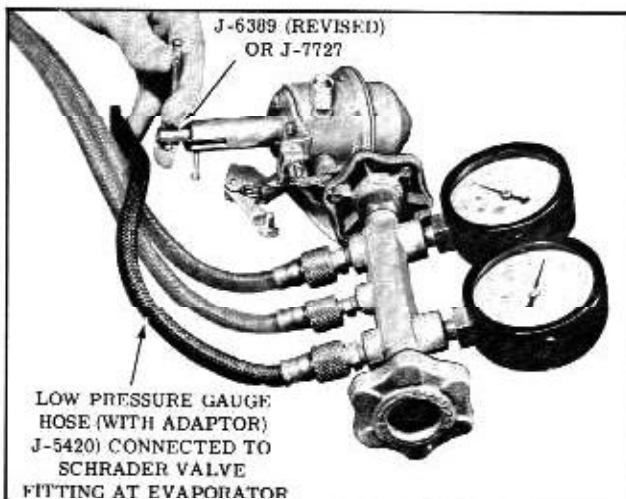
"Hot Gas" By-Pass Valve Adjustment
